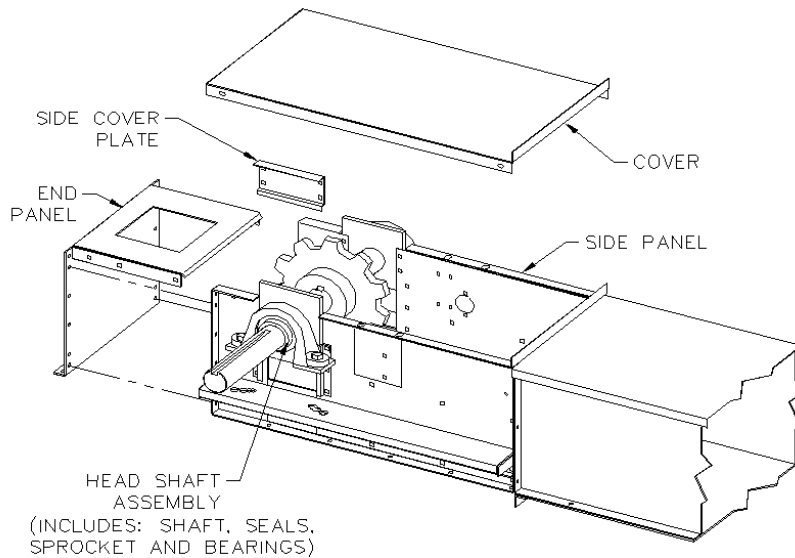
A, 12" & 17" Head Shaft Removal and Reinstallation
